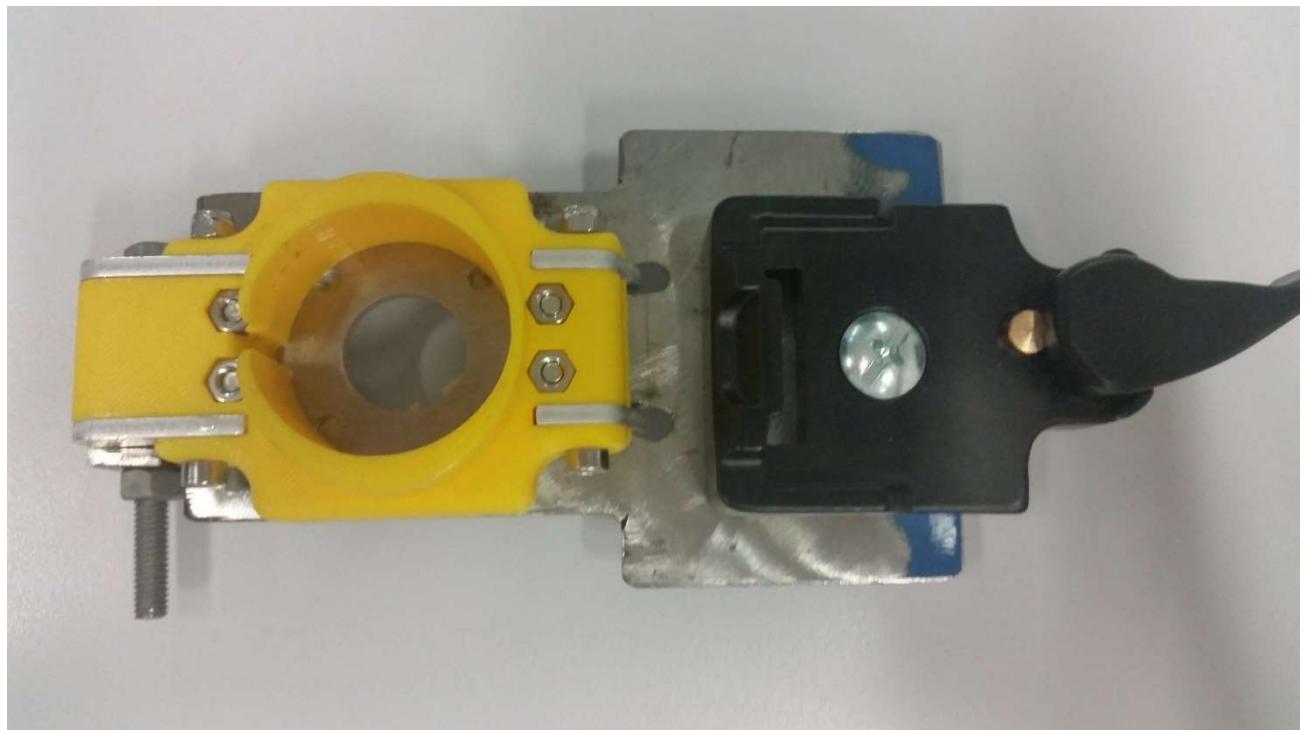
Mounting plate top view, Thick Paste Extruder component + Rectangular Plate Adapter attached.
